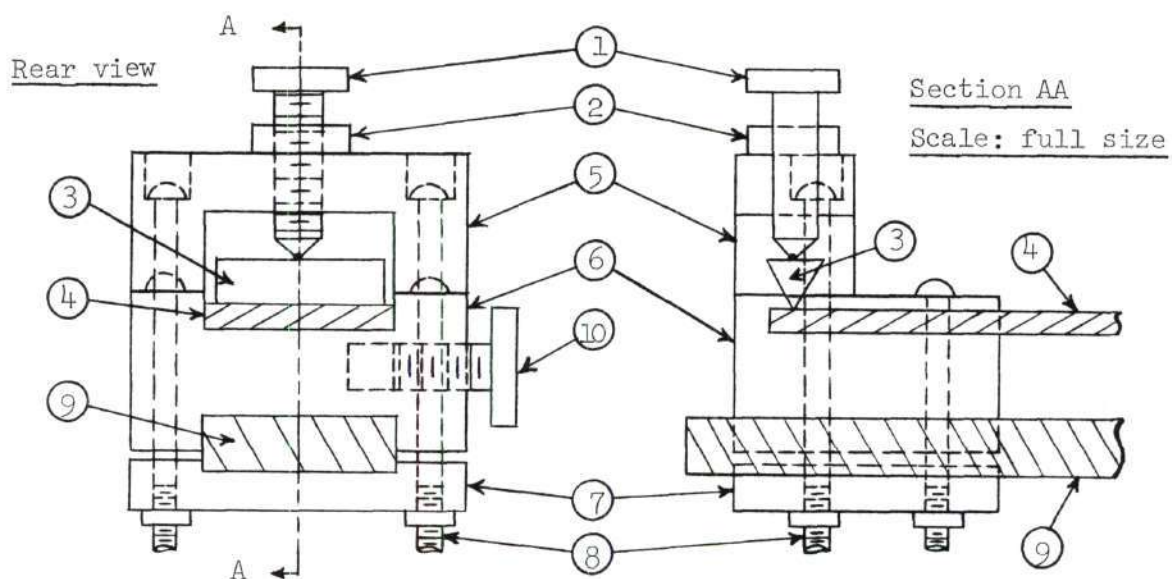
Film Holder Assembly in Test Chamber, Plus Detail Drawing of Film-End Block Assembly Connection
